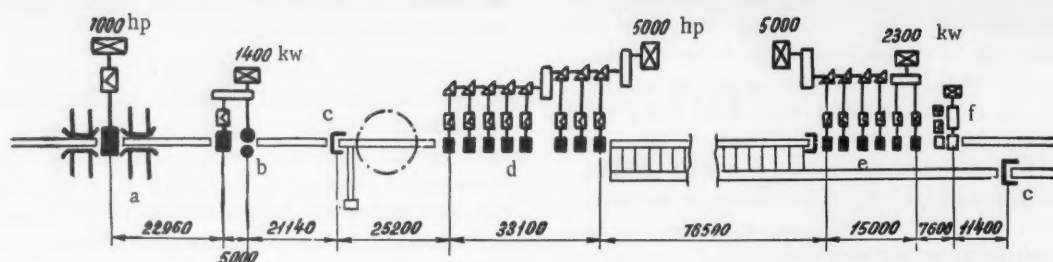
Layout of the equipment at blooming mill No. 2: a) 1150 reversing stand; b) additional nonreversing stands; c) shears; d) 630 continuous billet mill; e) 450 continuous billet mill; f) electrical planetary flying shears.
